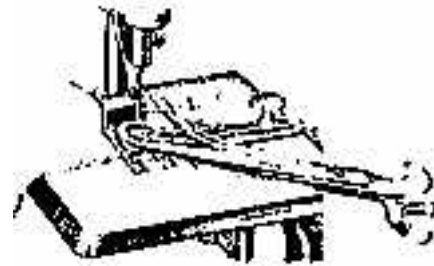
CUTTING THE THREAD CLOSE TO THE GOODS
